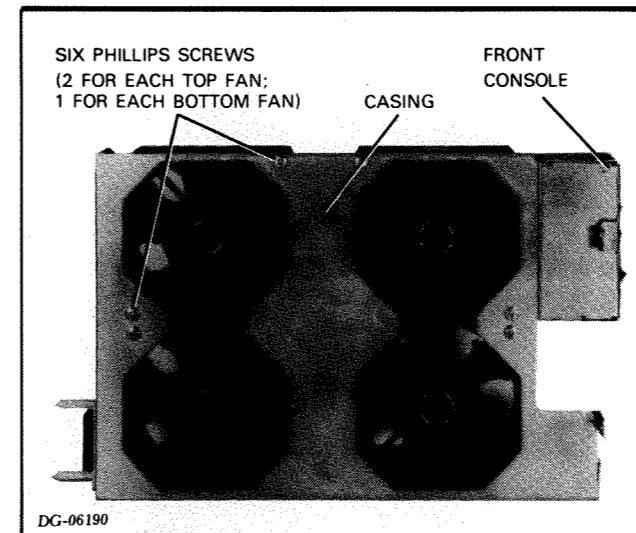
FAN MODULE FOR 16-SLOT CHASSIS (BACK VIEW)
